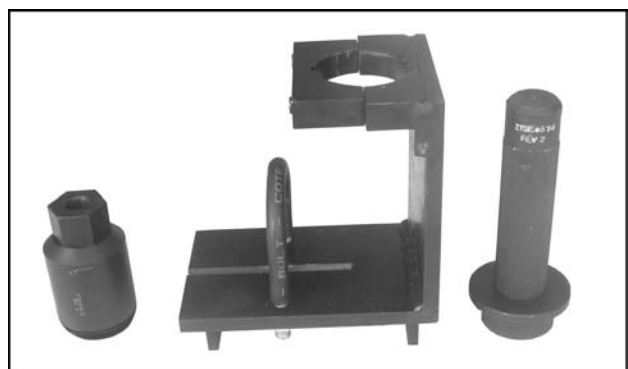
Turbo Crossover Tube Seal Remover and Installer, ZTSE4676
